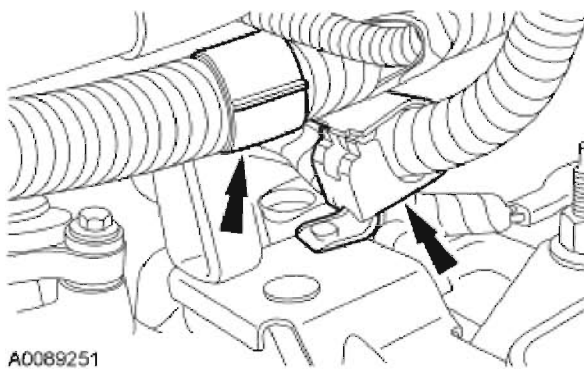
Locating Rear Transmission Fluid Cooler Tube
